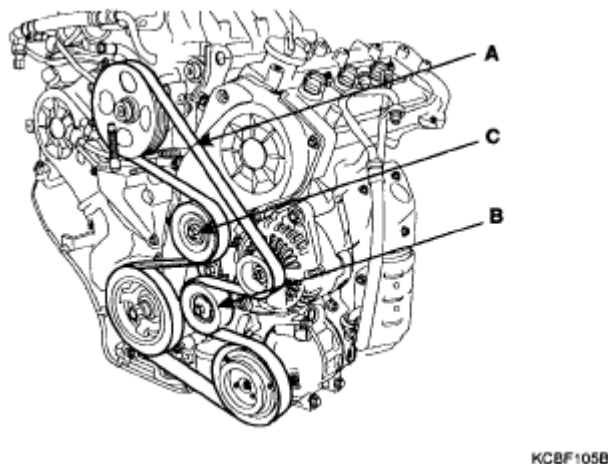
Identifying Drive Belt, Idler And Tensioner
